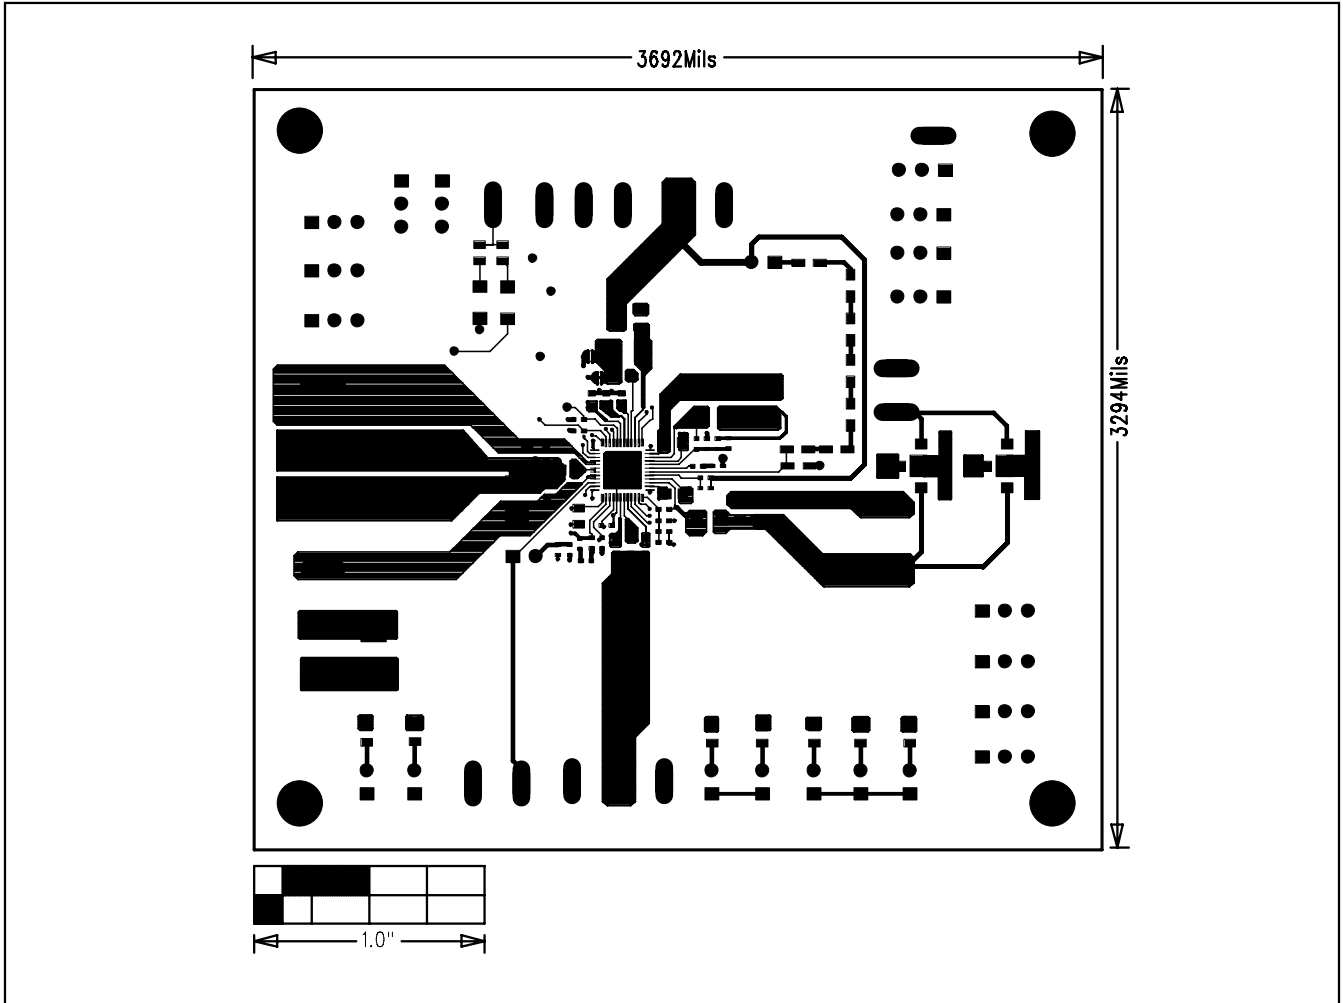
MAX8662 EV Kit PCB Layout—Top Layer 1
